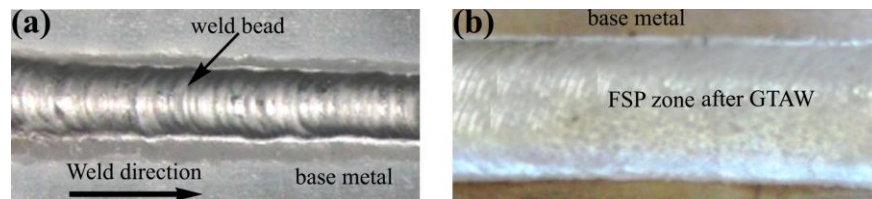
Micro Graph Shows of the Weld Bead Formation and Quality of the Welds of (a) GTAW and (b) GTAW and FSP Processed Joints
